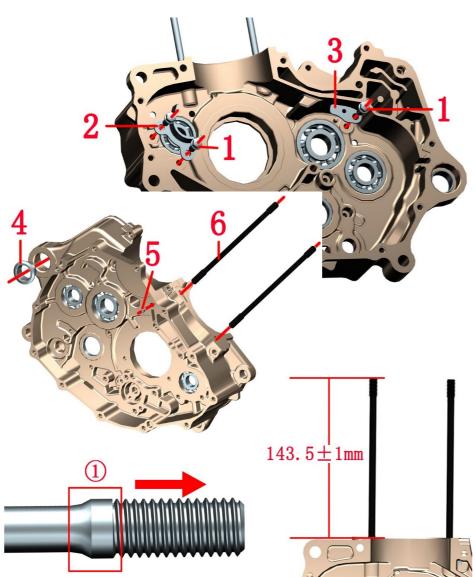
RIGHT CRANKCASE		ZT158MJ Right crankshaft box assembly-1	CHK
